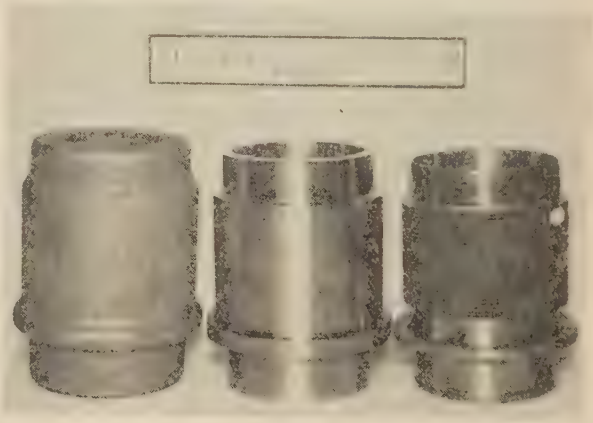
CYLINDER BARRELS FOR RADIAL ENGINES
